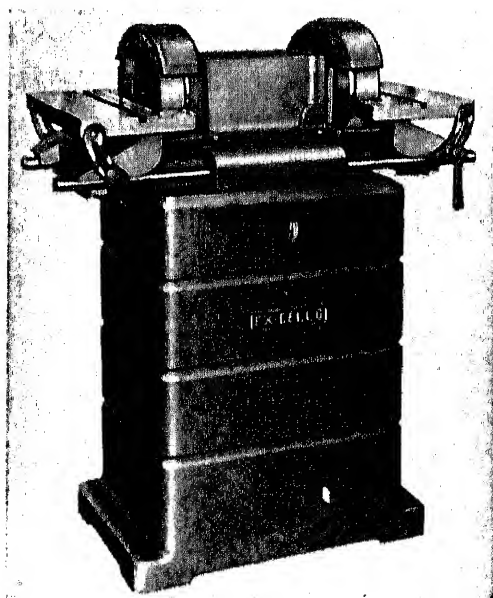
A medium size carbide tool grinder. (Courtesy Ex-Cell-O Corp.)
